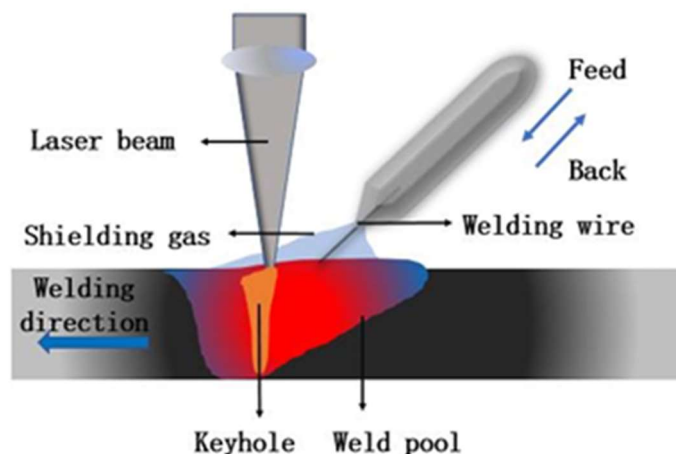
Schematic diagram of laser CMT composite welding
